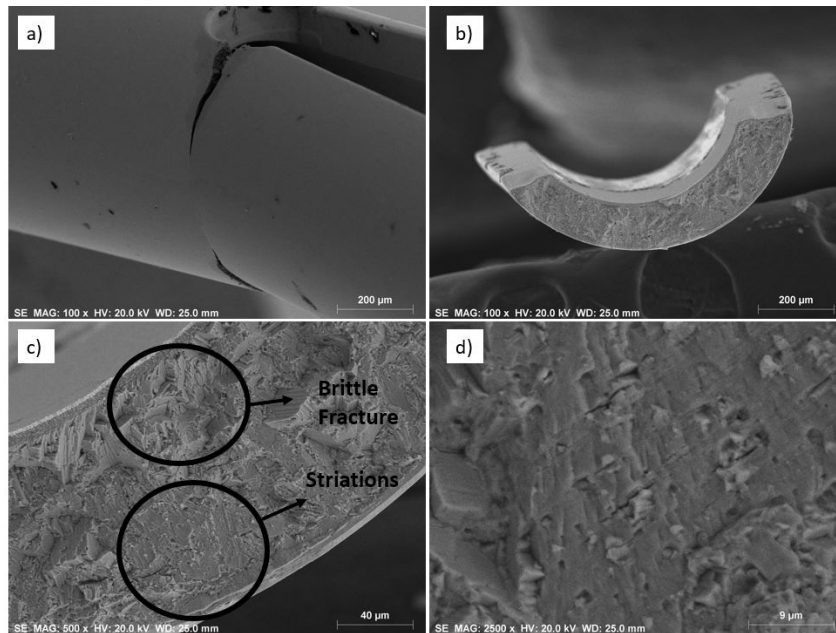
Analysis of fractured surface of connector 13. a) Crack appearance at the bottom of the socket; b) Picture of inside fractured surface after removing the finger from the socket; c) Picture of the brittle fracture; d) Amplification of the striations generated by fatigue.
